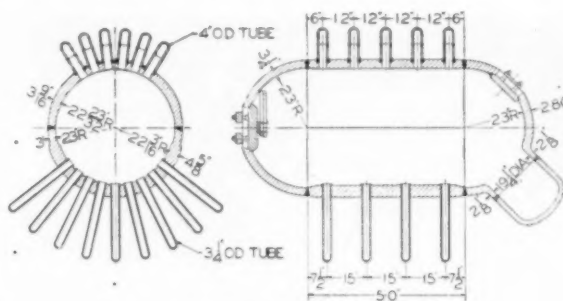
FULL-SIZE-DRUM FATIGUE SPECIMENS
